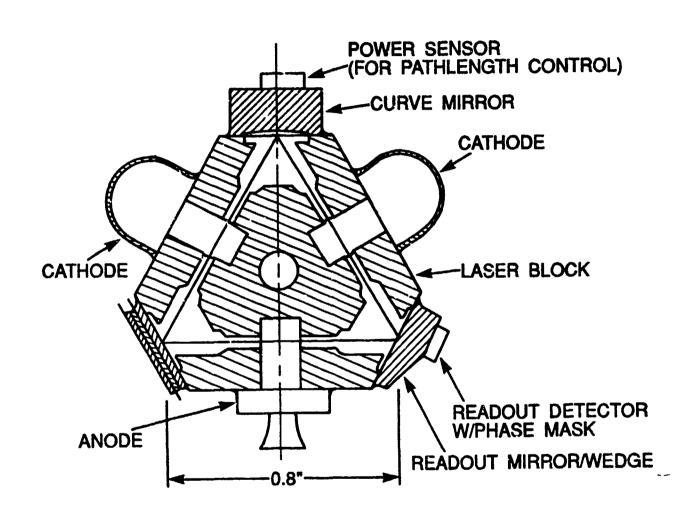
GG1308 RING LASER GYRO ASSEMBLY
